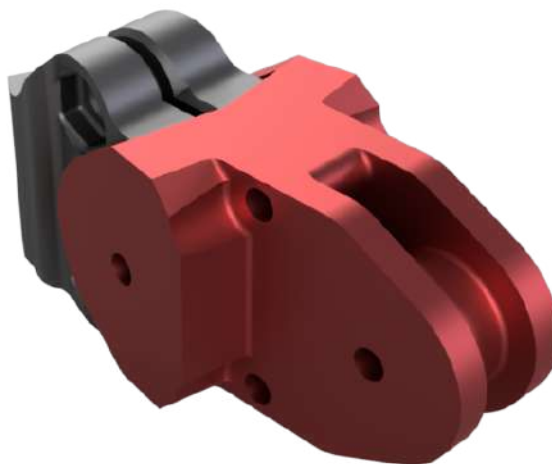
ADJUSTABLE TUBE CLAMP IN SITU
